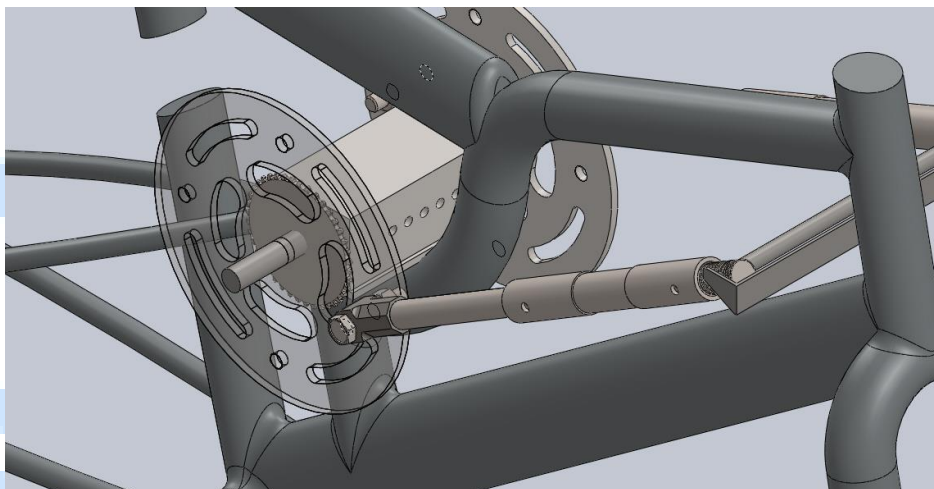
Sprocket and flywheel pivoted with pneumatic cylinders
